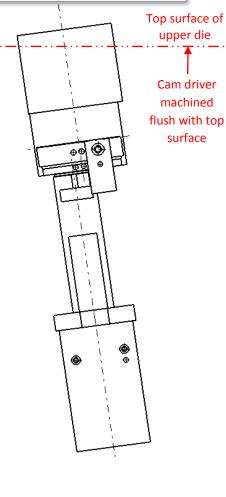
and 2: In position 1 and 2 the pillar can be tightened to the cam driver by a socket head screw and the whole unit can be lifted out of the die. (Housing stays in the blank holder)
